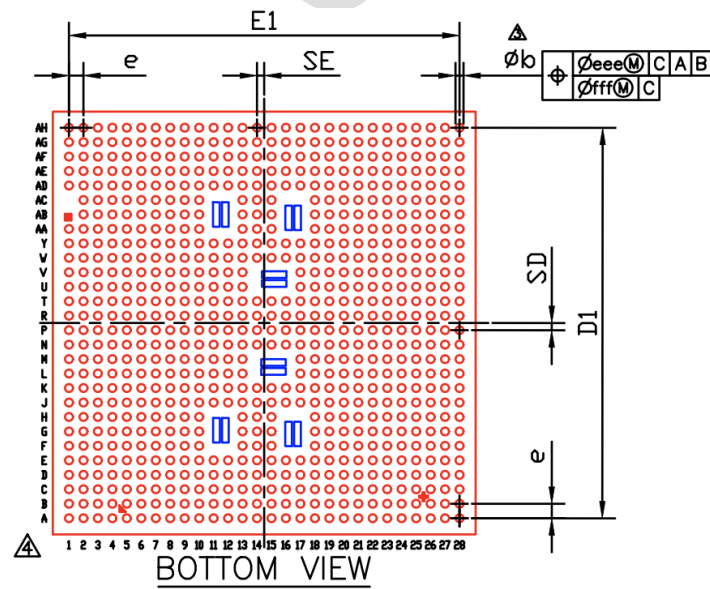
RK1820/ RK1828 Package Bottom View
